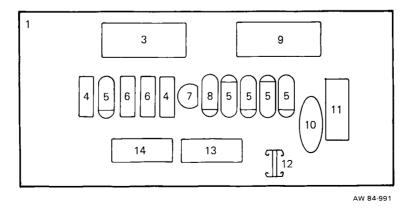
Model 187995 Hold Circuit PCB, Component Locations
